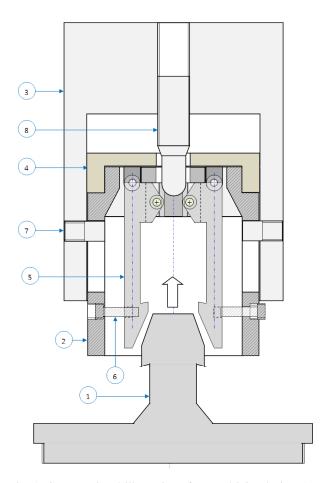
Cross-sectional illustration of a novel joint device; 1. Wedge on top of a canister parade, 2. Hook box, 3. Joint device body, 4. Piston head of hook box, 5. Hook, 6. Hook spring, 7.Sliding joint bar, 8. Pushing bar.
